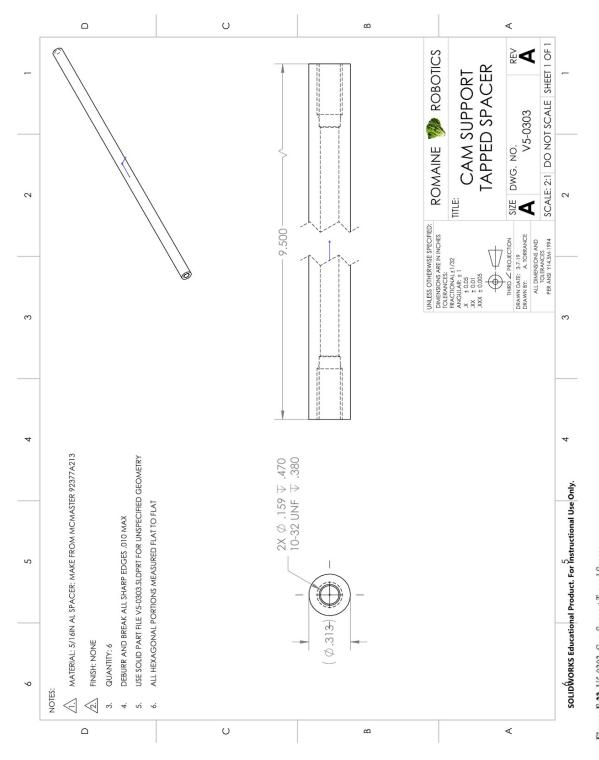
V5-0303 Cam Support Tapped Spacer
